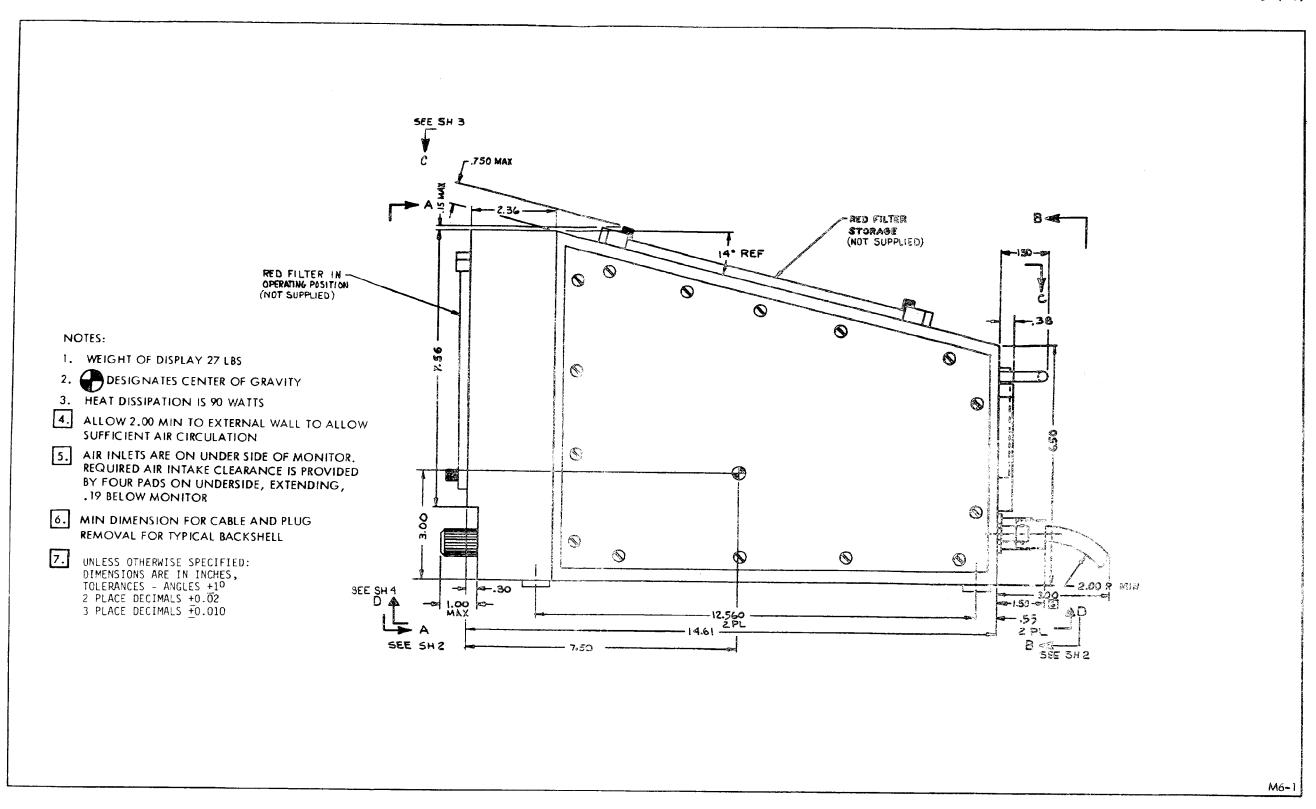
Indicator, video, outline drawing, (sheet 1 of 4)
